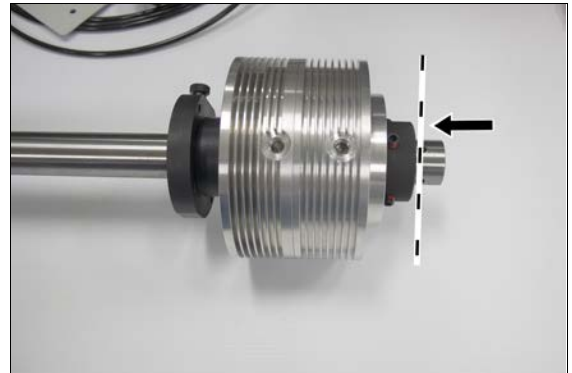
Draw tube inserted through the pneumatic cylinder.
